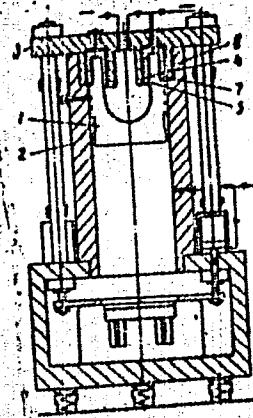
1 - Piston-hammer; 2 - cylinder;
